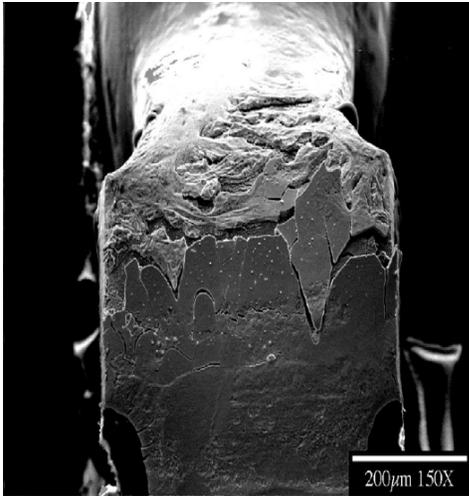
32LQFP, bright Sn, Sn/Ag/Cu solder. All leads exhibited gross cracking and/or irregular reflow.
